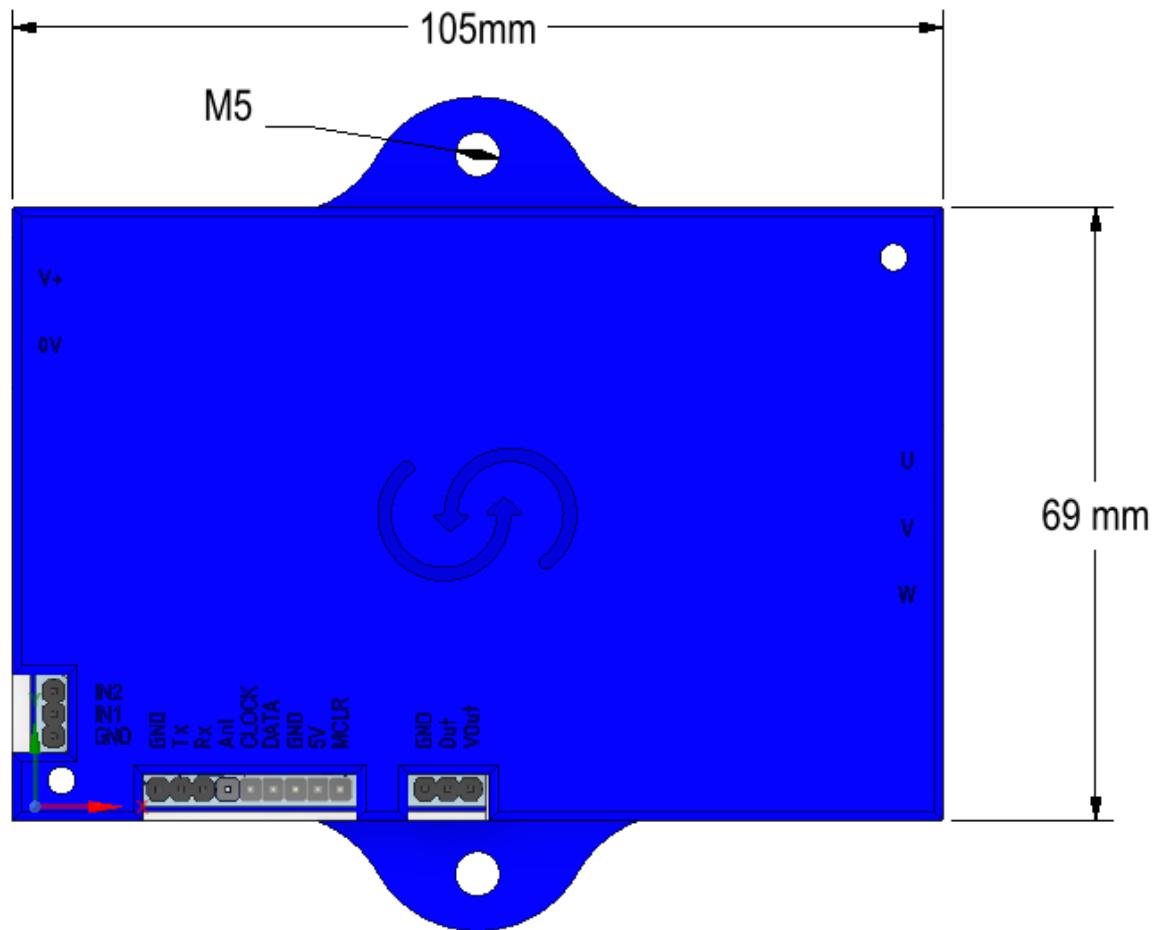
ZIKODRIVE 2 Top View (With Casing)
